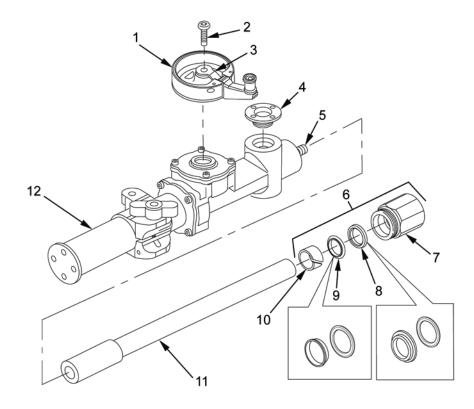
Installation of Hand Crank and Special Nut Assembly.
